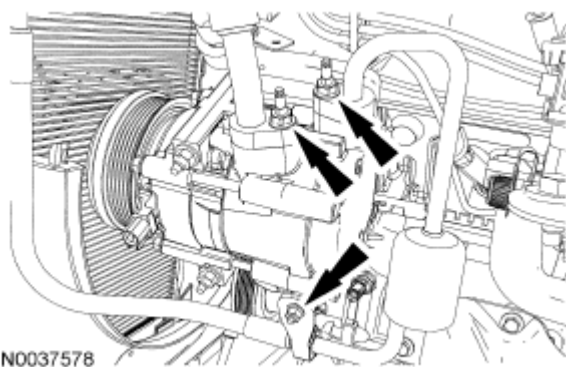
Locating A/C Tube Bracket Nut And A/C Fitting Nuts
